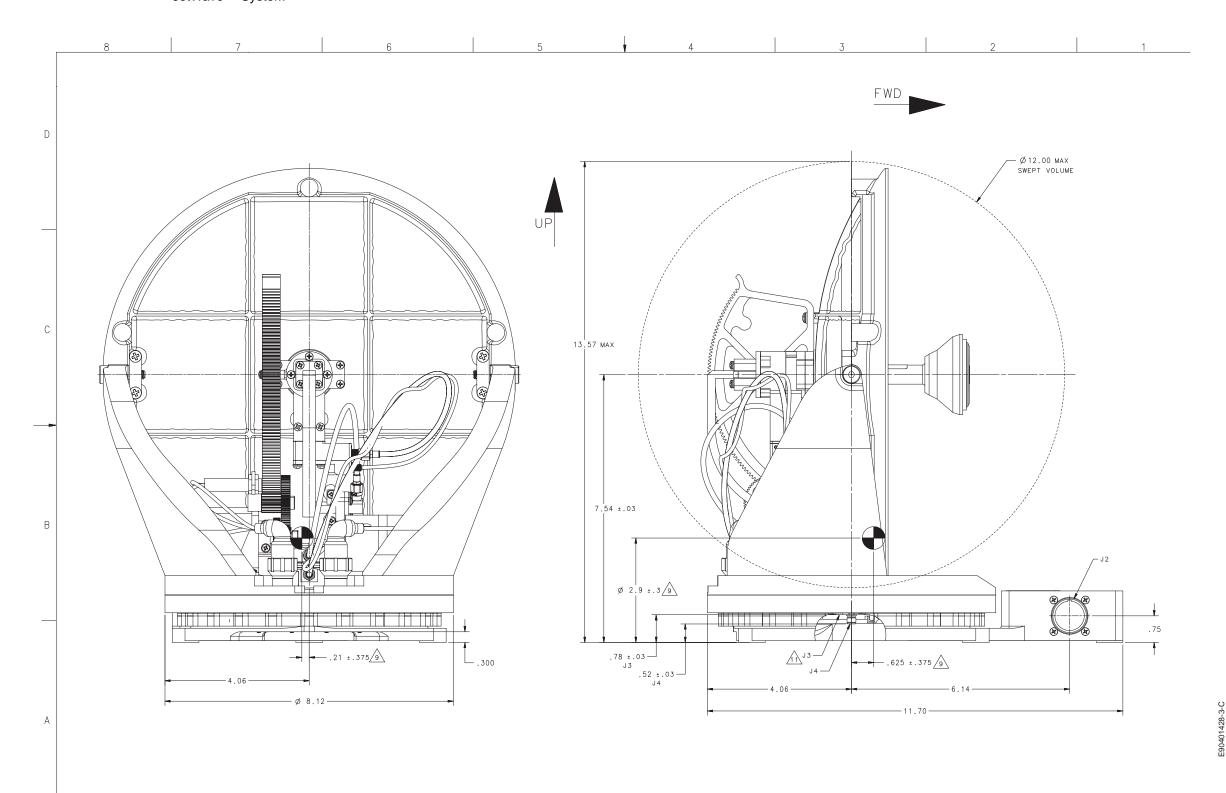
TMA Outline and Installation Drawing (Sheet 3 of 4)
